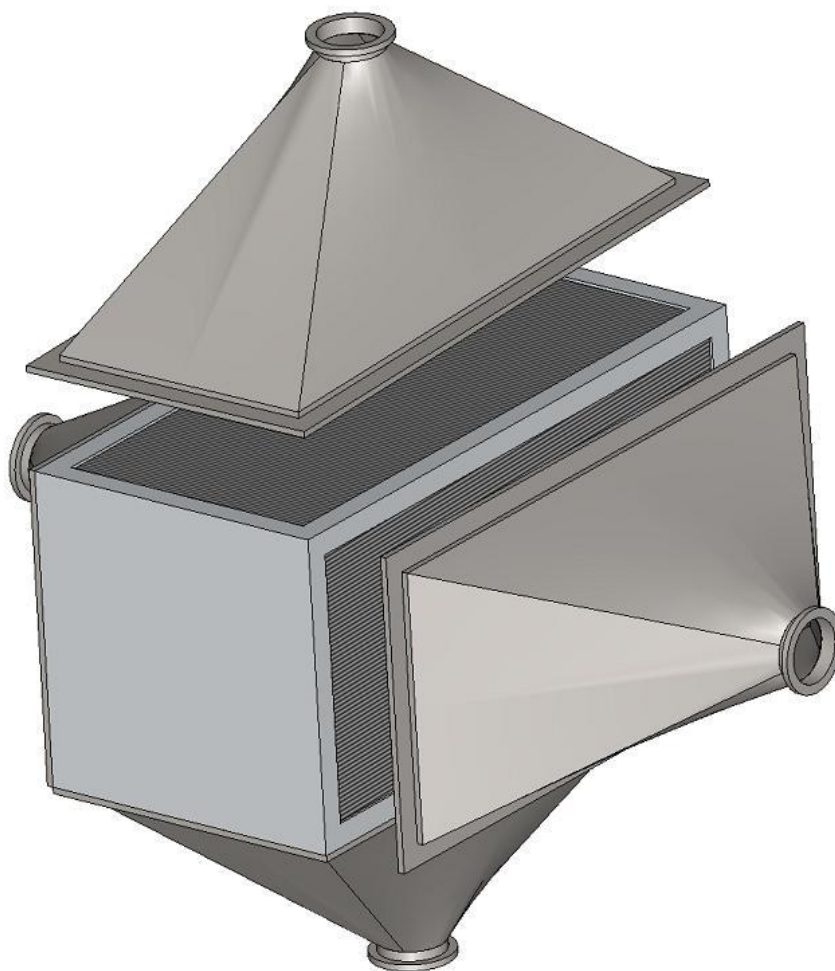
Solidworks drawing showing manifold and reactor core arrangement
